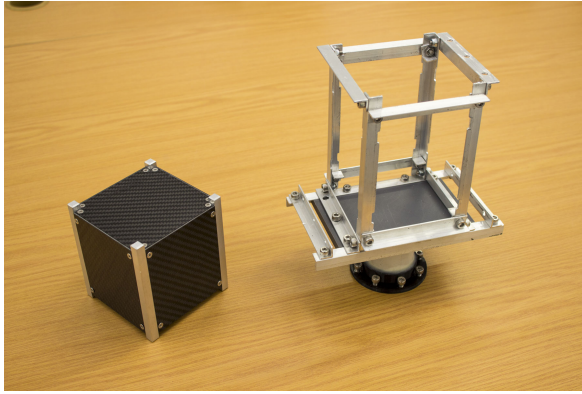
Aluminium CubeSat prototype and the empty vibration cage assembly.
